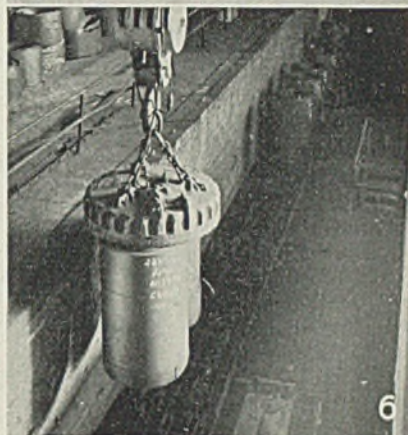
Magnet removing hot crop ends from cooling pit. Presence of steam and hot water make this a hazardous application. Fig. 6—Coil handling magnet transferring two coils of strip from hot mill conveyor to storage. Fig. 7—Coil handling magnet 50 inches diameter with elongated inner shoe and flush bottom. Fig. 8—Rectangular magnet for handling large plates. Sag of the plate should not set up a stress beyond the elastic limit of steel. Fig. 9—Two rectangular magnets on spreader bar for handling rails from a cooling box
